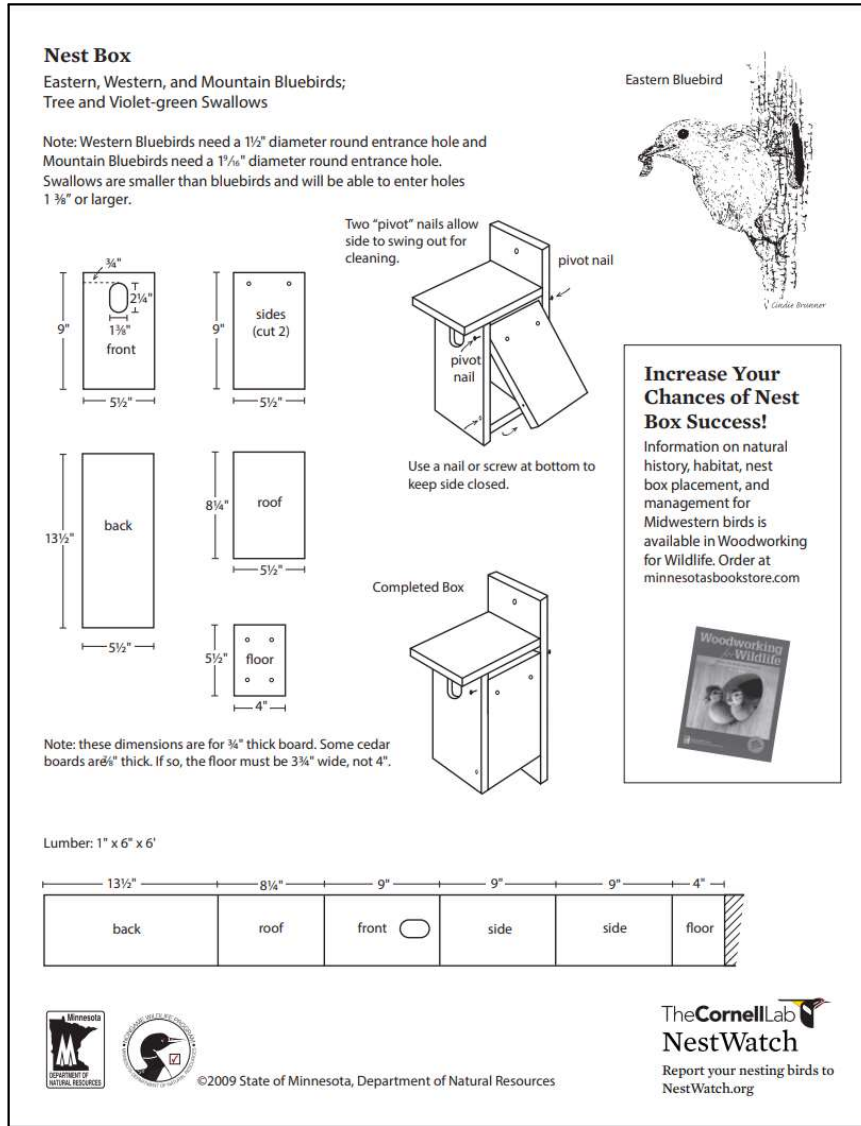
Building plan for nest boxes from The Cornell Lab of Ornithology
